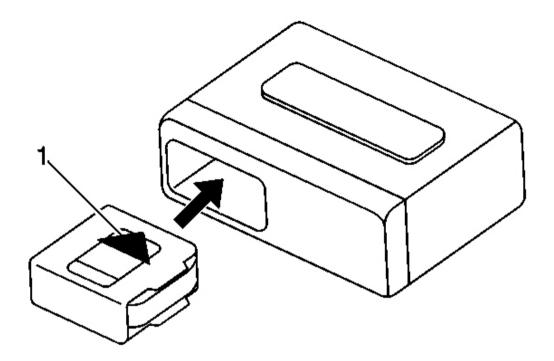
Inserting The CD Changer In The Player Courtesy of GENERAL MOTORS CORP.
